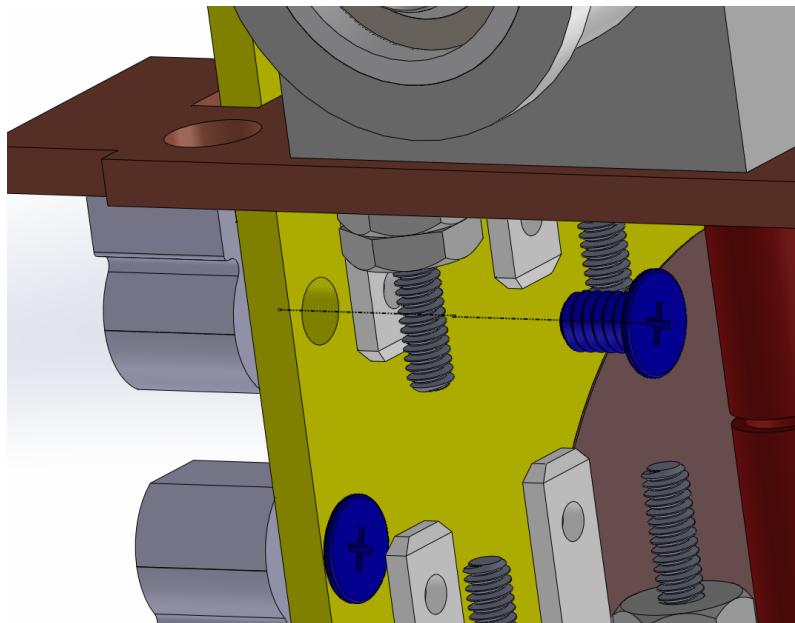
Use ONE M2 Board connection screw to connect the INNER FRONT of BPL to T2. To complete this step, you may need to bend the Wire Harness out of the way.
